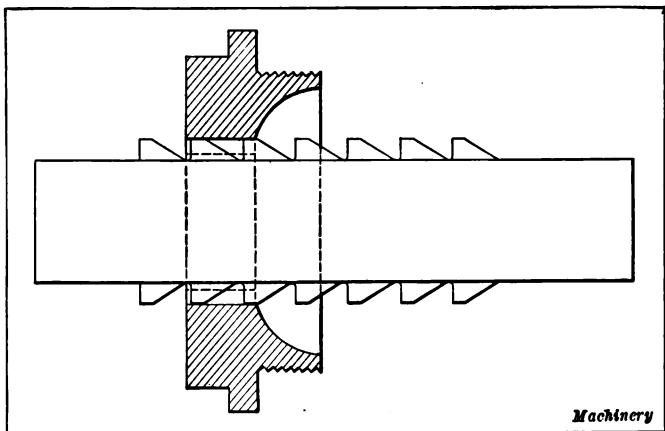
Broaching Two Keyways Simultaneously In a Turret Lathe
